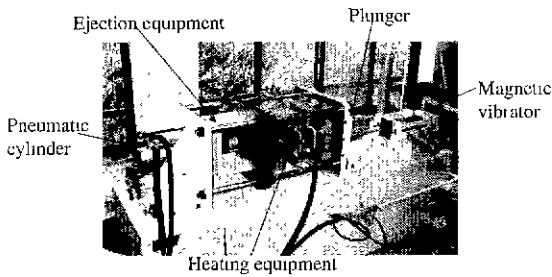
A plaster die-casting machine employing pressurization and vibration
